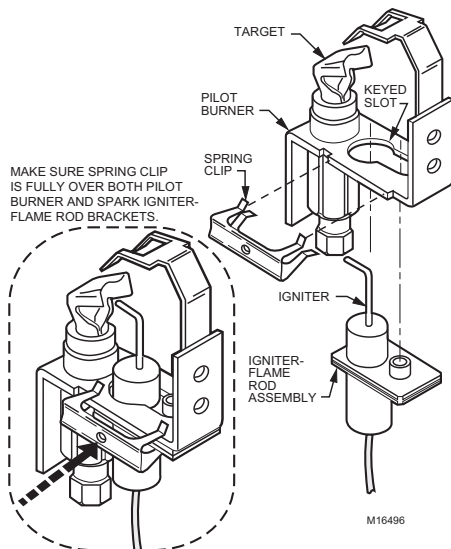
Replacing the original spark igniter-flame rod assembly with the Q3305 Igniter-Flame Rod Assembly.
